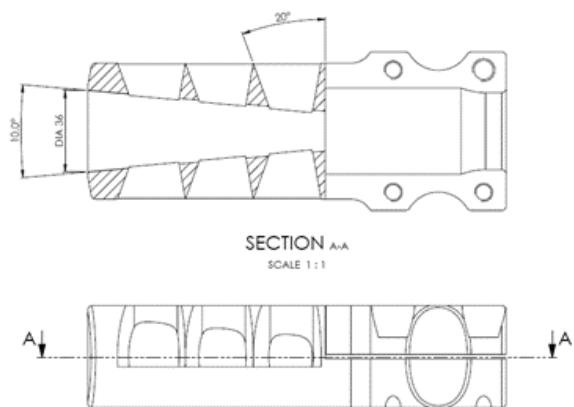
Drawing of Prototype 8 With 20° Vent Opening on Both Sides of the Barrel
